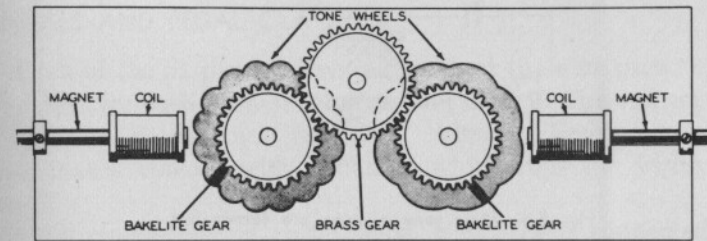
One of the 24 Hammond tone-wheel assemblies.
